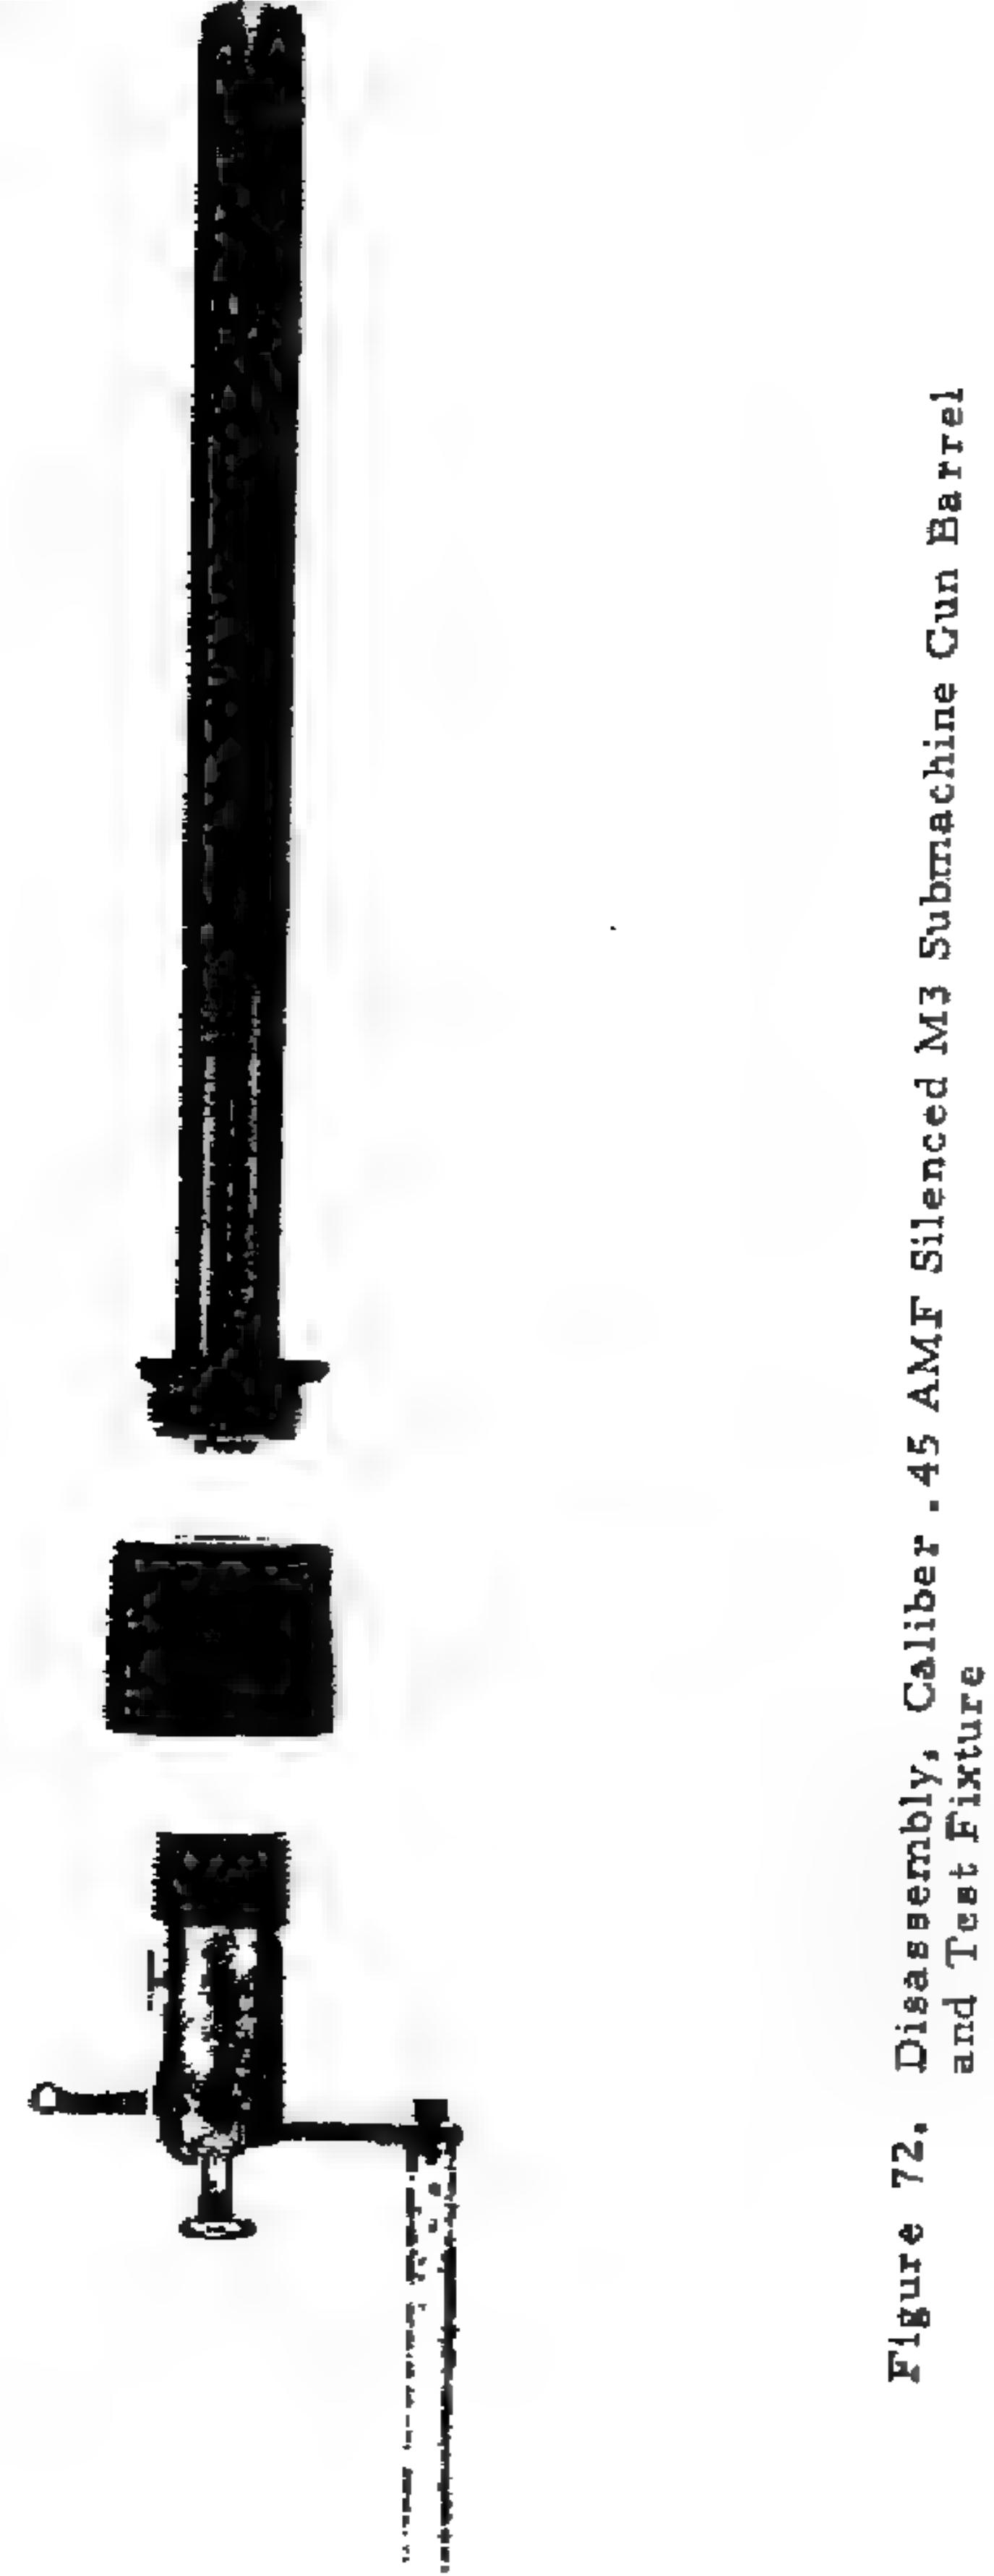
Disassembly, Caliber .45 AMF Silenced M3 Submachine Gun Barrel and Test Fixture
